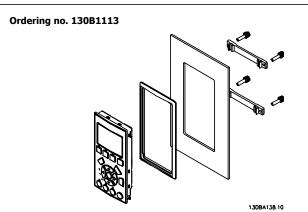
LCP Kit with graphical LCP, fasteners, 3 m cable and gasket.
